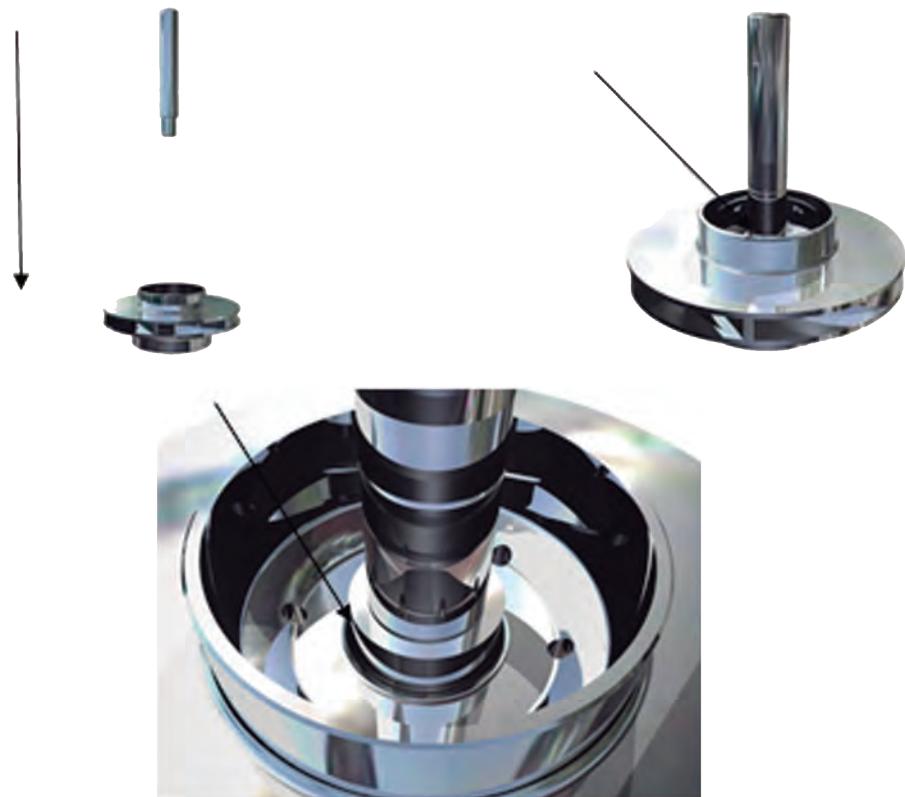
Introducing the shaft inside the impeller until it reaches the step on the shaft.
